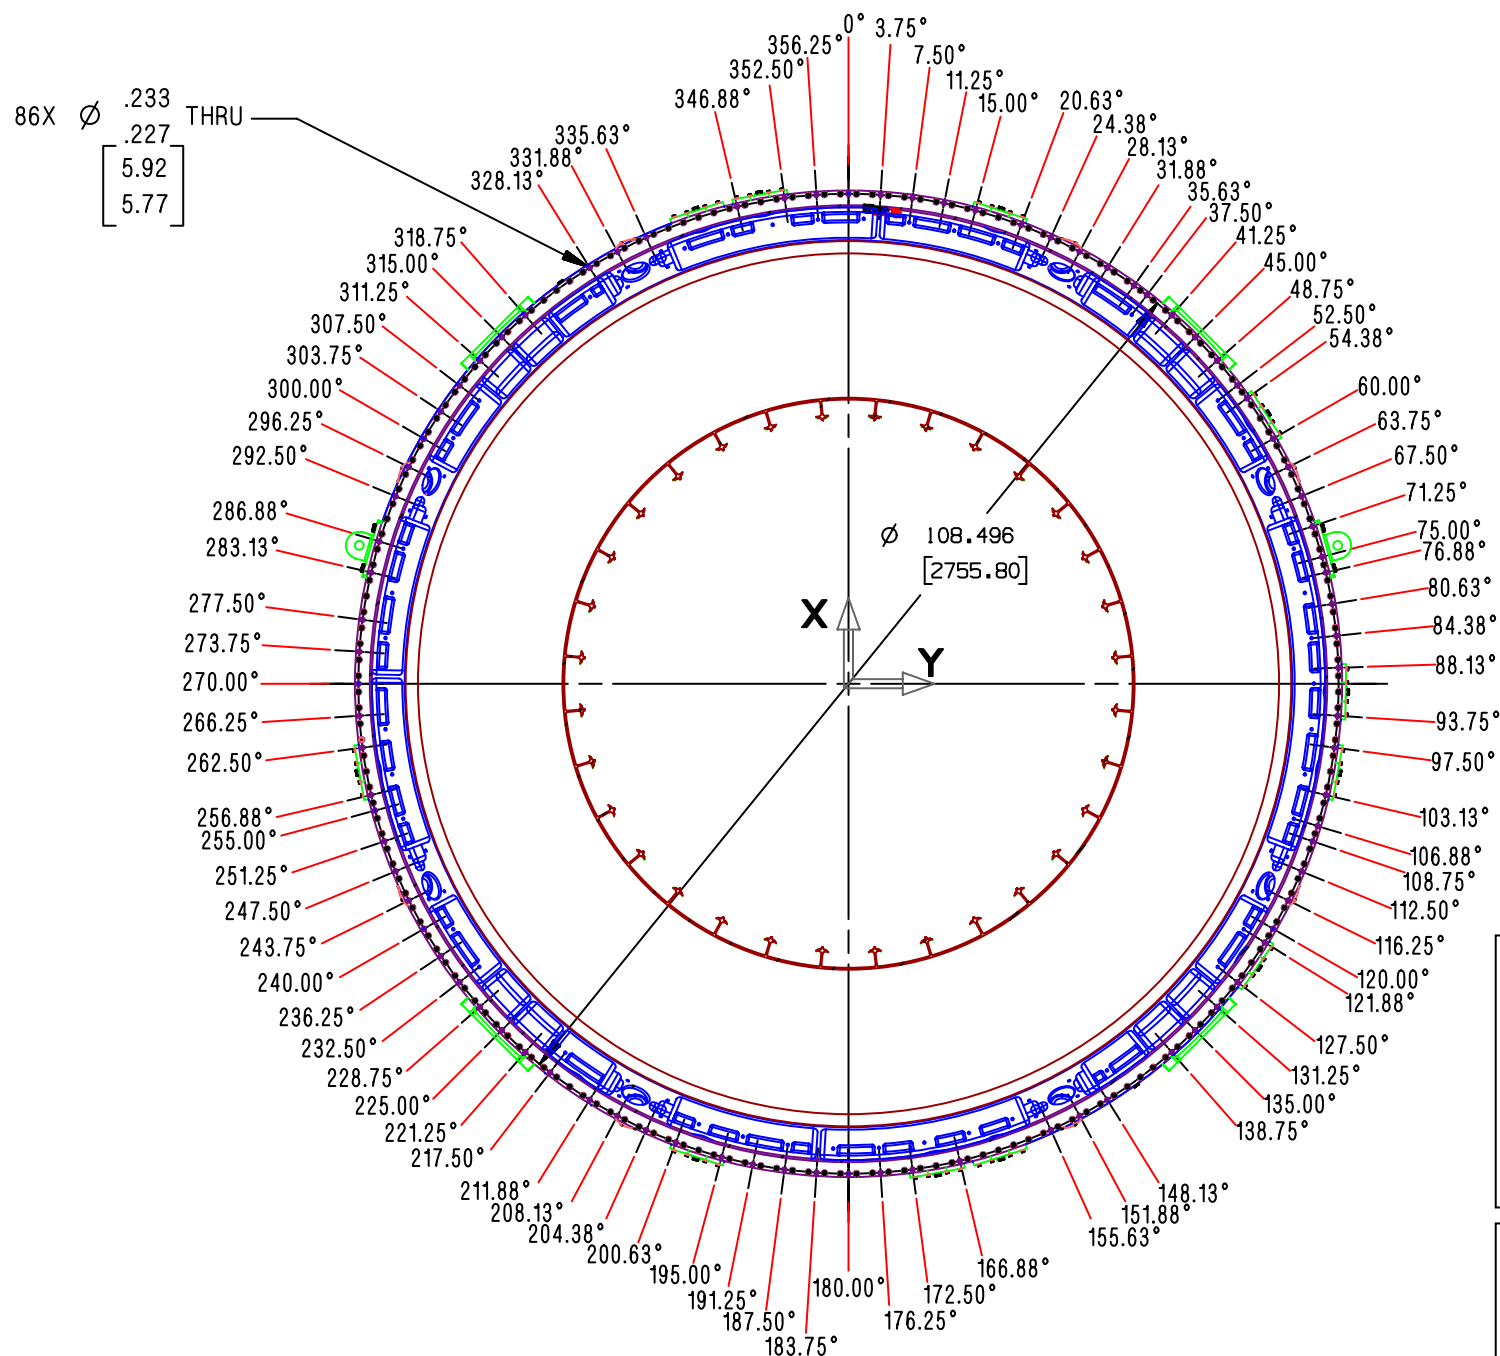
Generic Bolt Hole Pattern on VC Outer Cylinder Upper Flange
